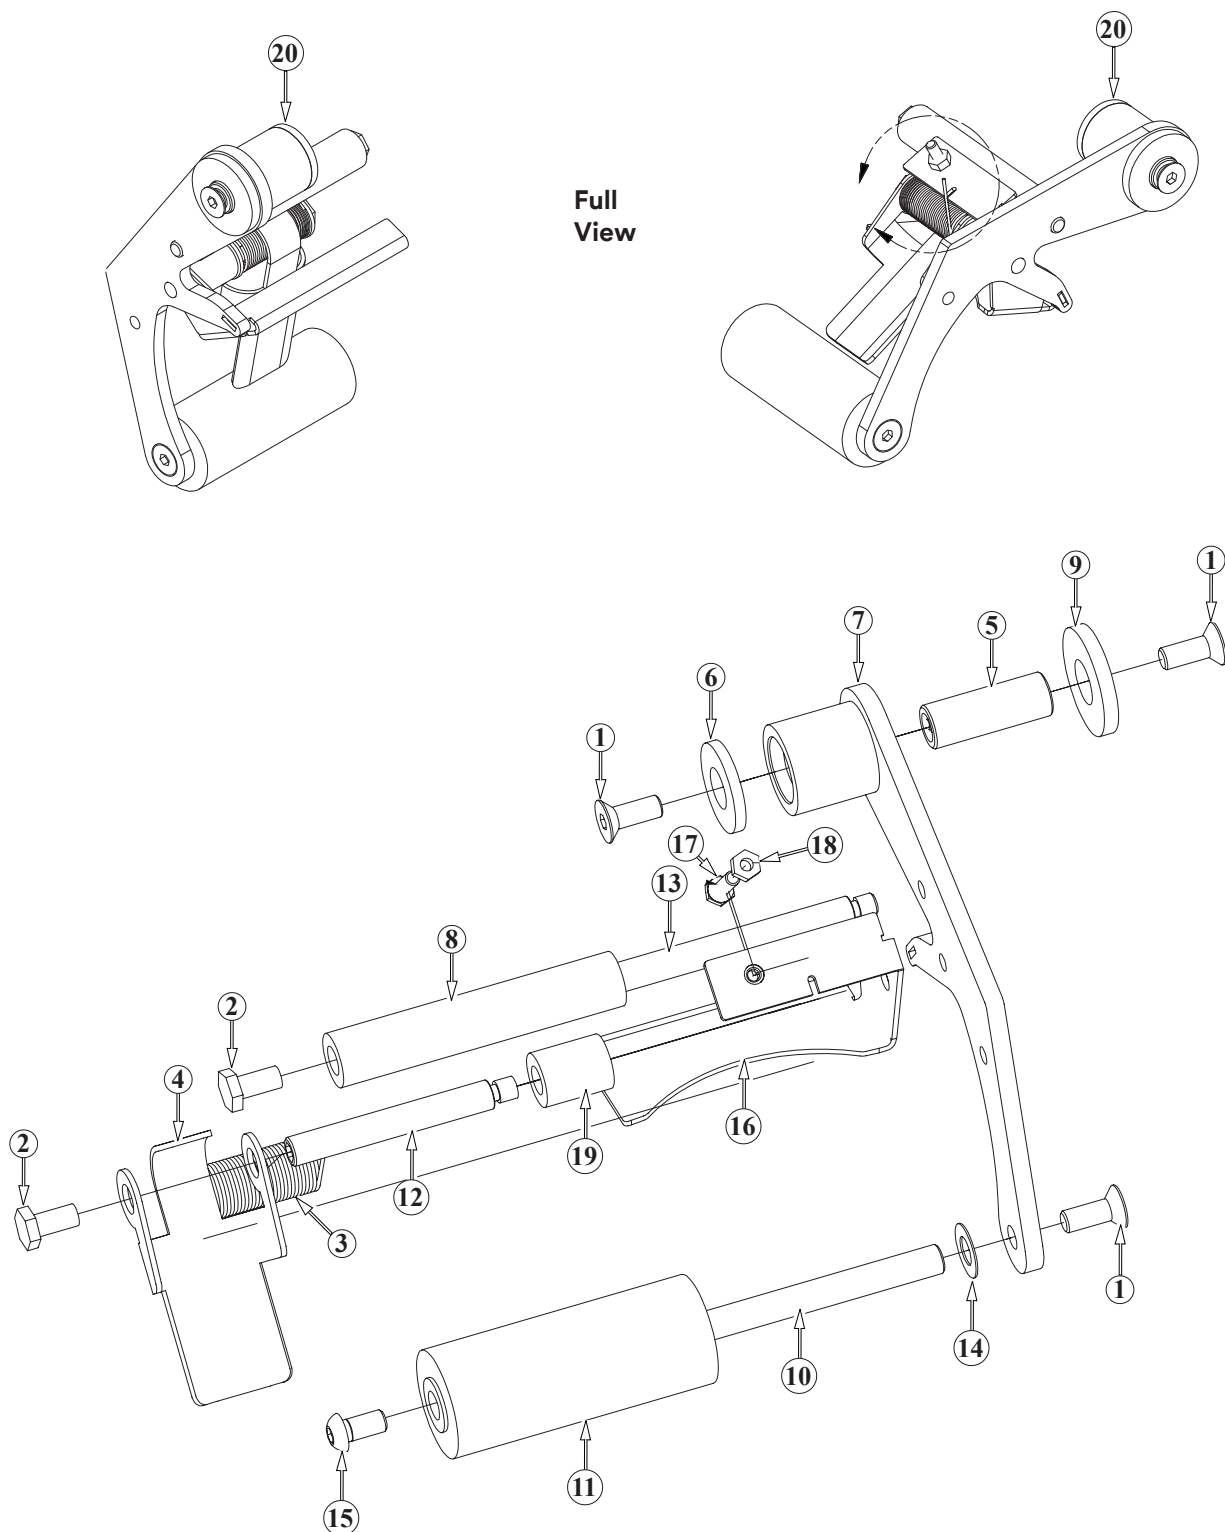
Lower Taping Head / Applying Arm Assembly
